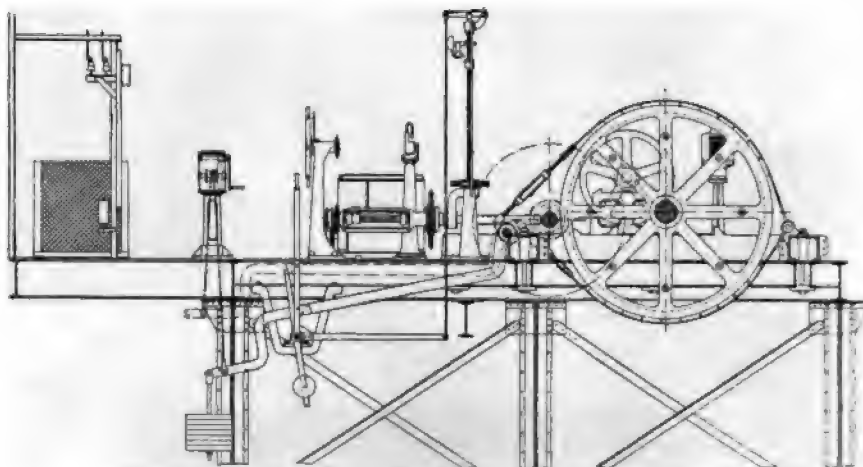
Switchboard Controller and Brake Mechanism Blast Furnace Hoist.
